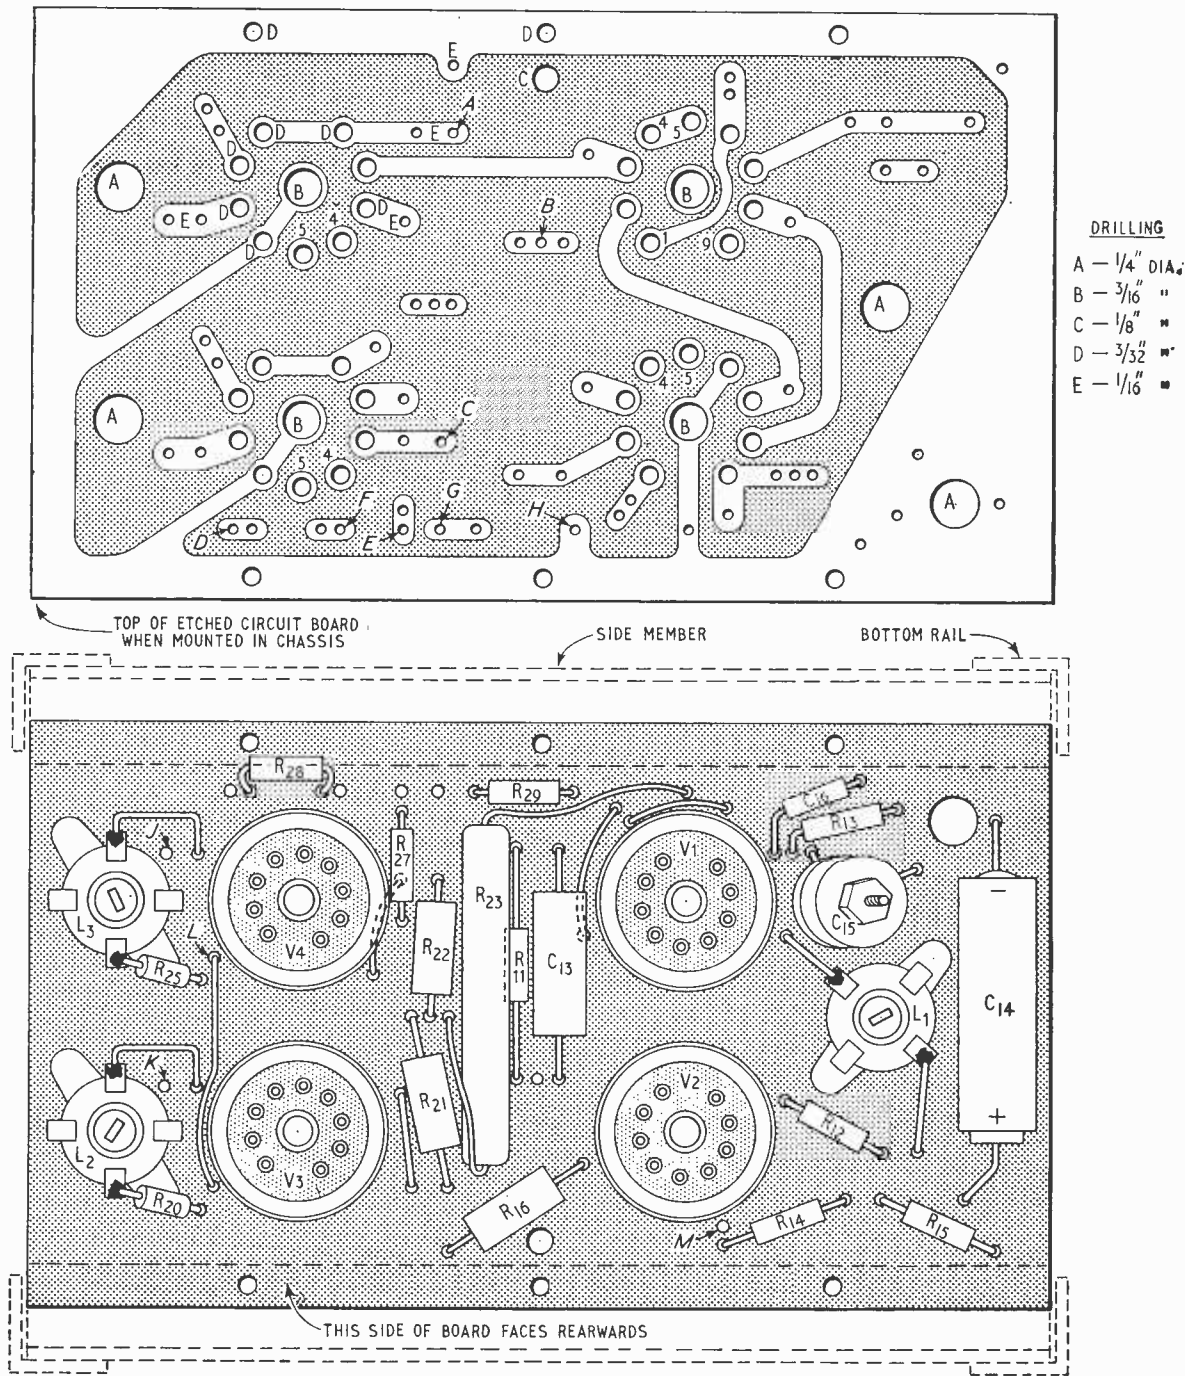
Layout and wiring of printed-circuit board. Drawing is full-size. Connections to "A," "B," etc., will be shown later.
